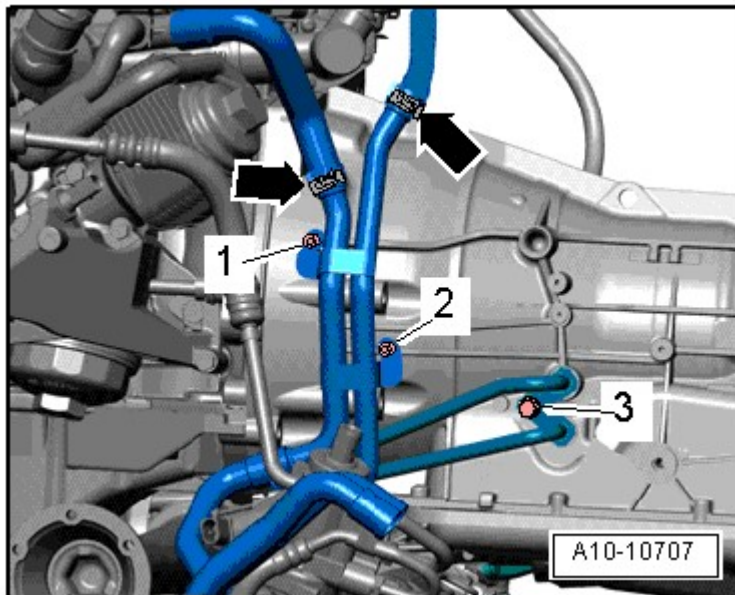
Identifying Rear Coolant Pipe Bolts -1 To 2- And Bolt -3- For ATF Lines From Transmission
